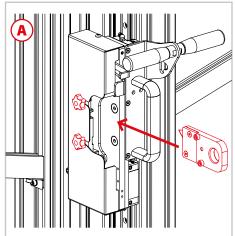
FIGURE A: Insert the selected cutting head into the cutting head holder and fix it using the knobs, as it is possible to see in the figure (A).
